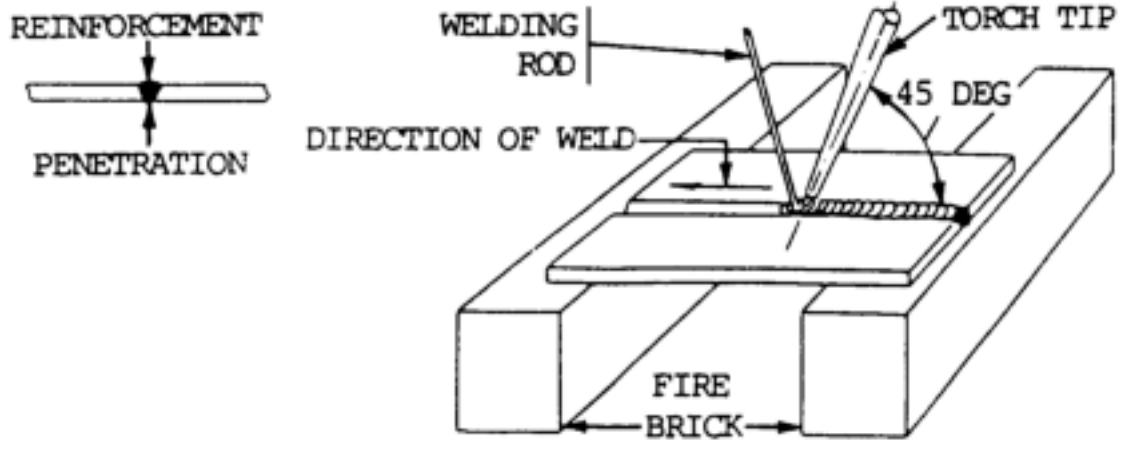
Position of rod and torch for a butt weld in a flat position.
